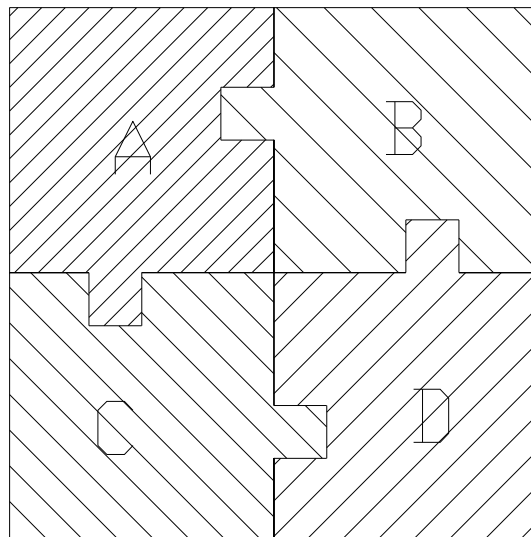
A product that can be assembled with a C-S-NL-M assembly
